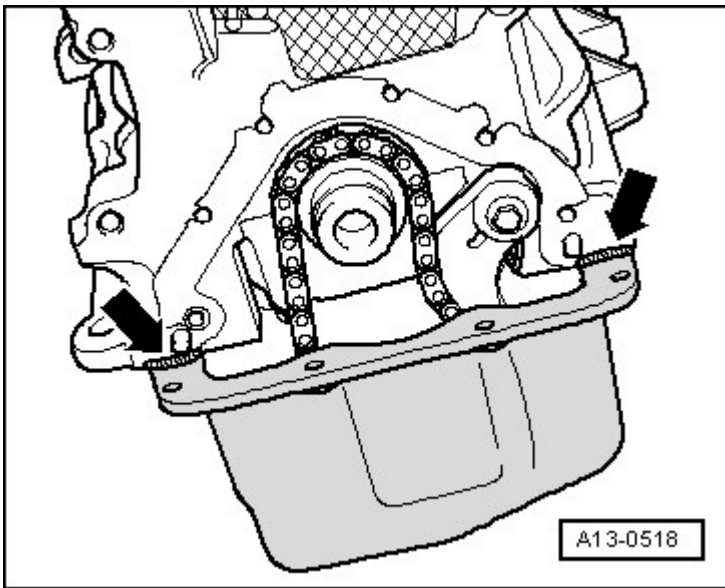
Applying Thin Bead Of Sealant To Edge Between Cylinder Block And Oil Pan
